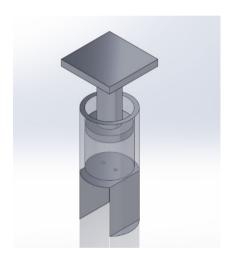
SolidWorks drawing of the desalination equipment, showing steel parts.
